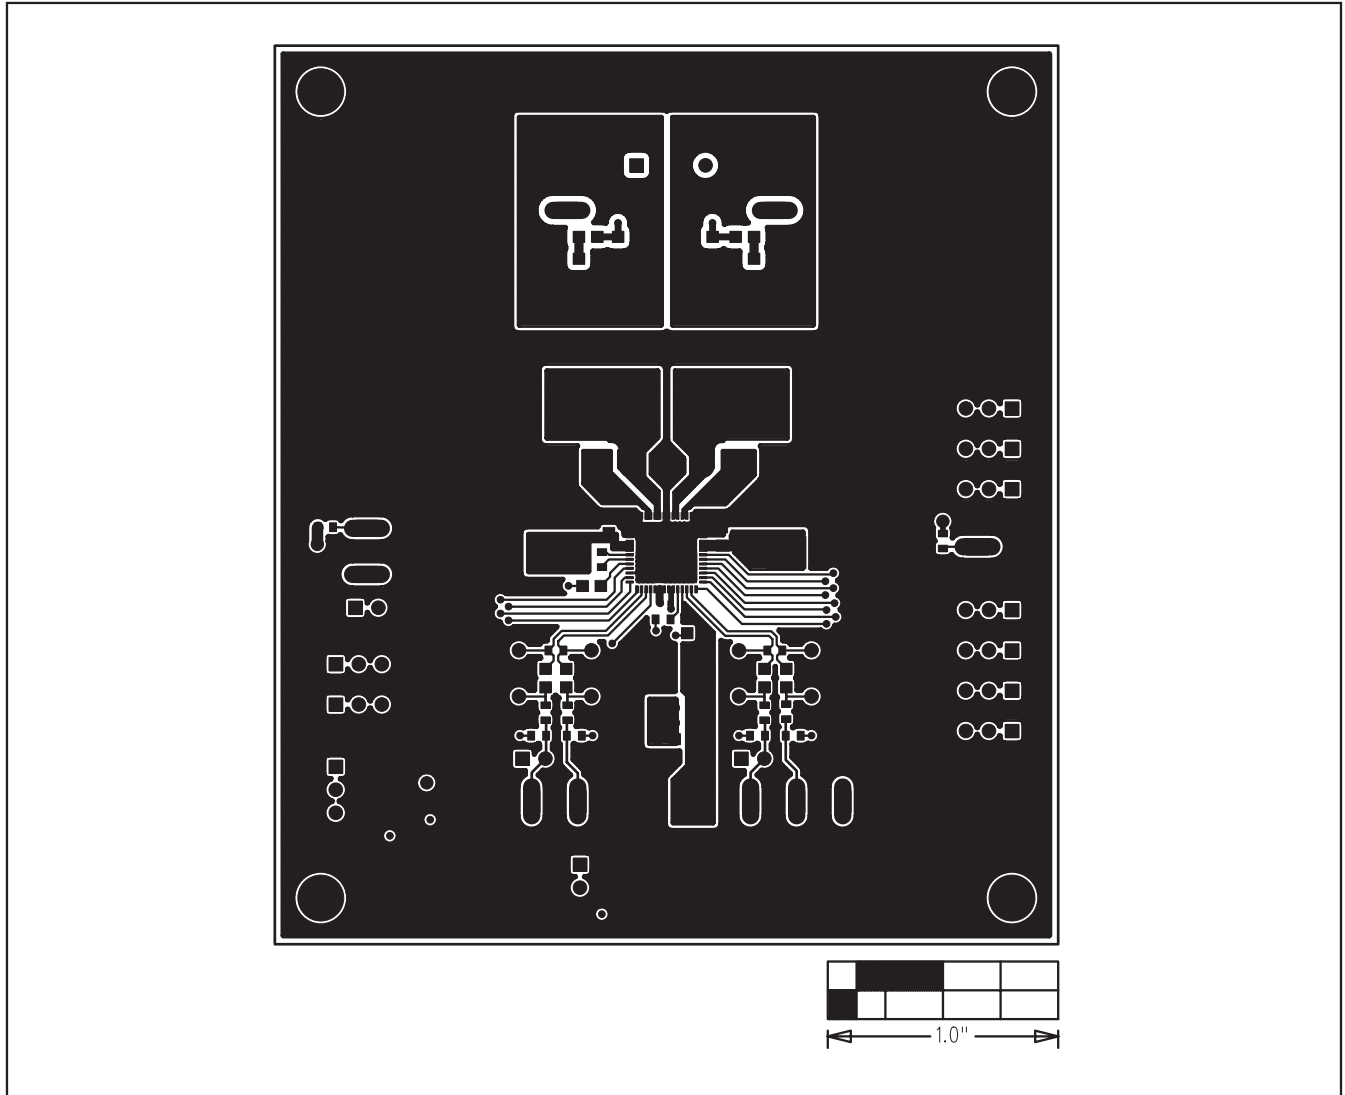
MAX9709 EV Kit PCB Layout—Component Side
